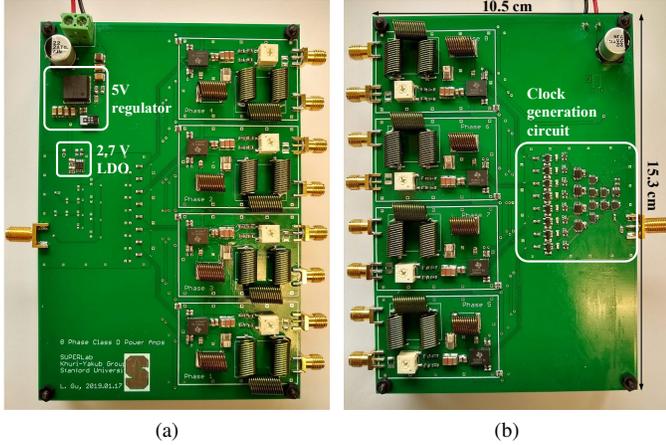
8-phase Class-D GaN RF driver prototype picture. (a) Top view, (b) Bottom view.
